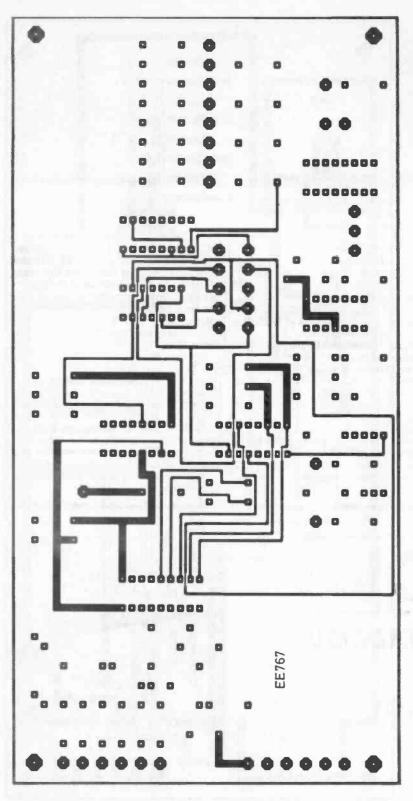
Full size copper foil track master pattern for top, component side of the p.c.b.
